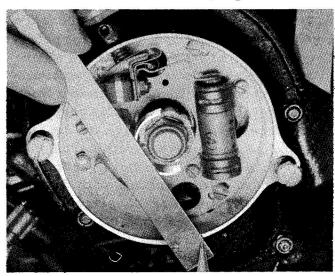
Magneto Breaker Point Adjustment (Bosch)
